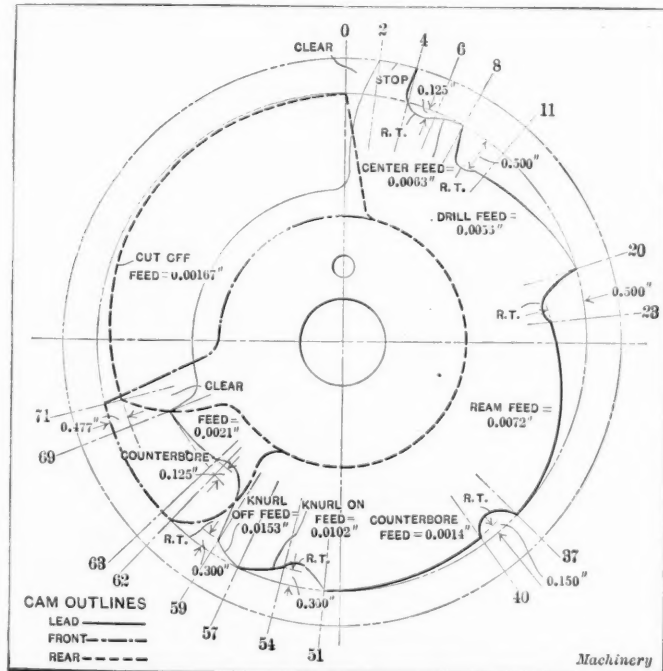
Cams used in Producing the Piece shown at A in Fig. 1
